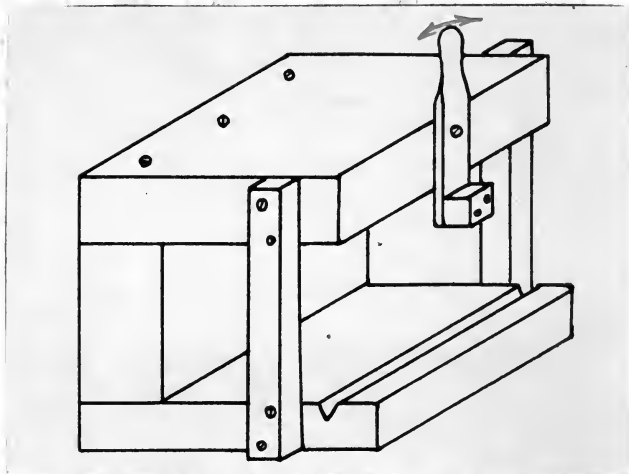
Fixture For Holding Workpiece In Vertical Position
